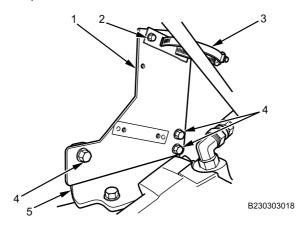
Ether (Cold) Start Valve Assembly Bracket.
